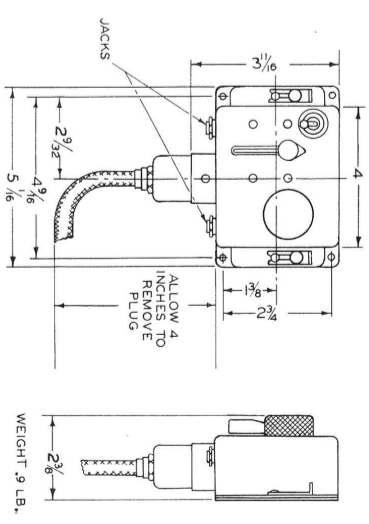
Installation Dimensions and Weights, Model RU-18 and Model RU-19 Equipments
